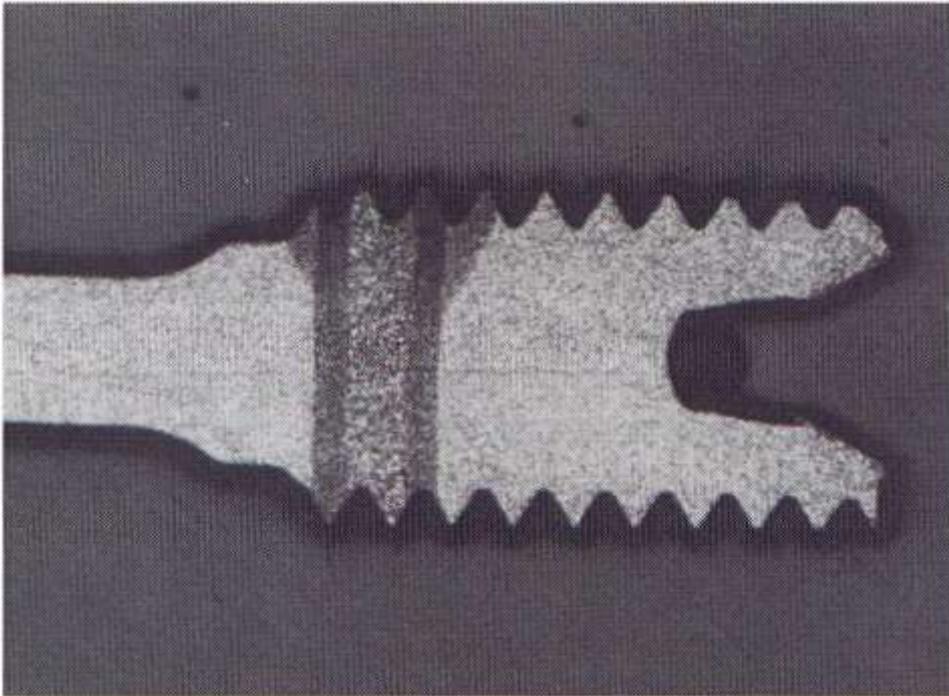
The electron beam welded creep specimen where the weldment pies inside the threaded ends (Ref. 7).
